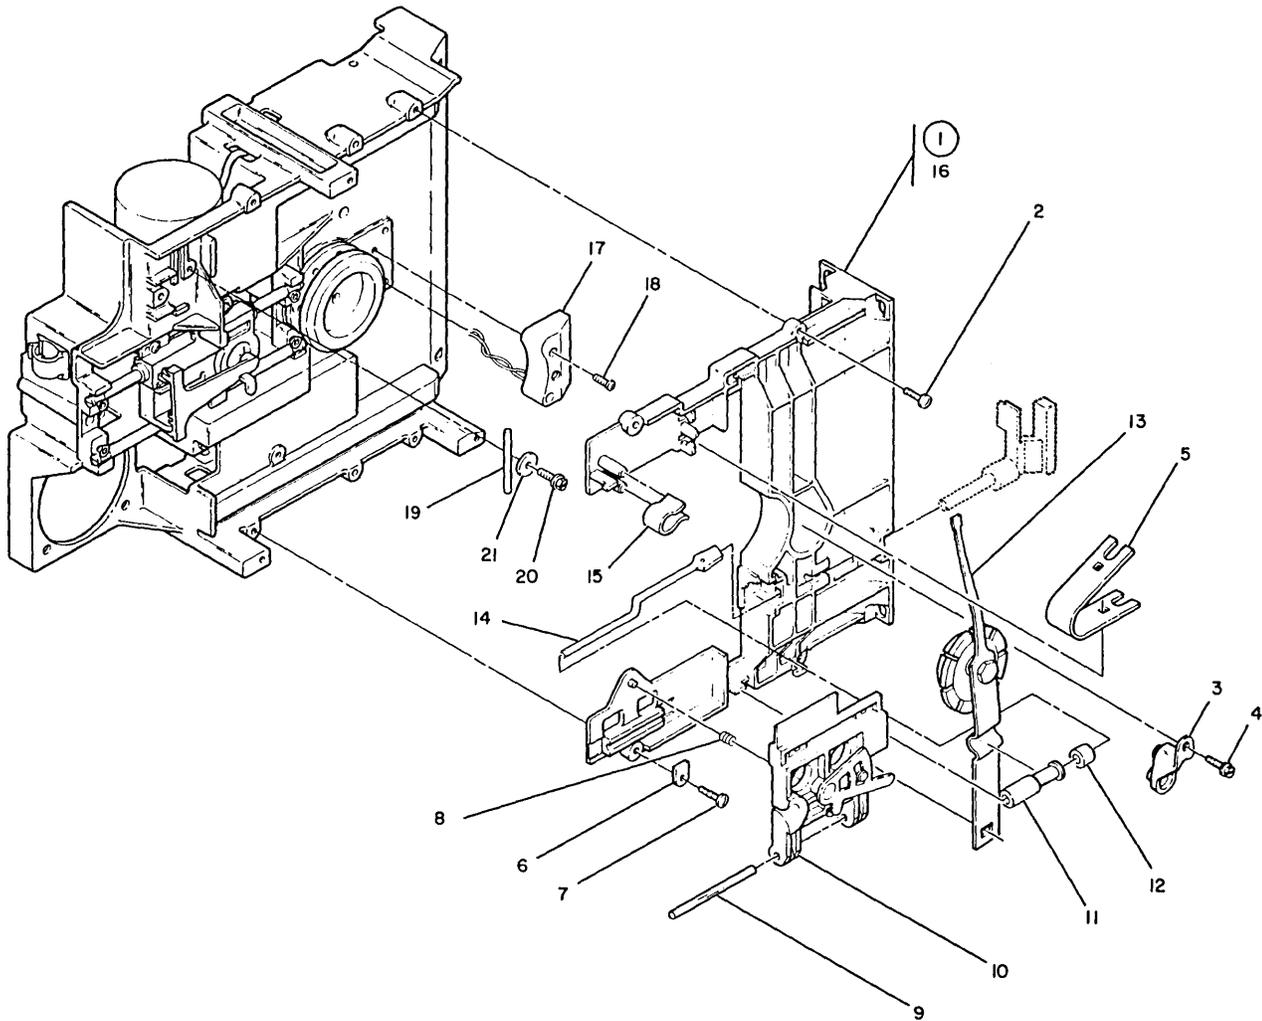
DISKETTE GUIDE AND CLAMP ASSEMBLY
